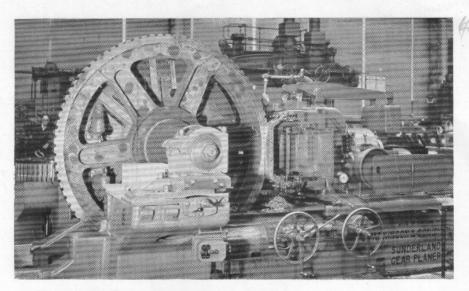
(above)— A recent acquisition to the Heavy Machine Shop is this No. 275 "Sunderland" Gear Planer which generates gears up to 124 in. dia. × 15 in. face × 1 D.P.
